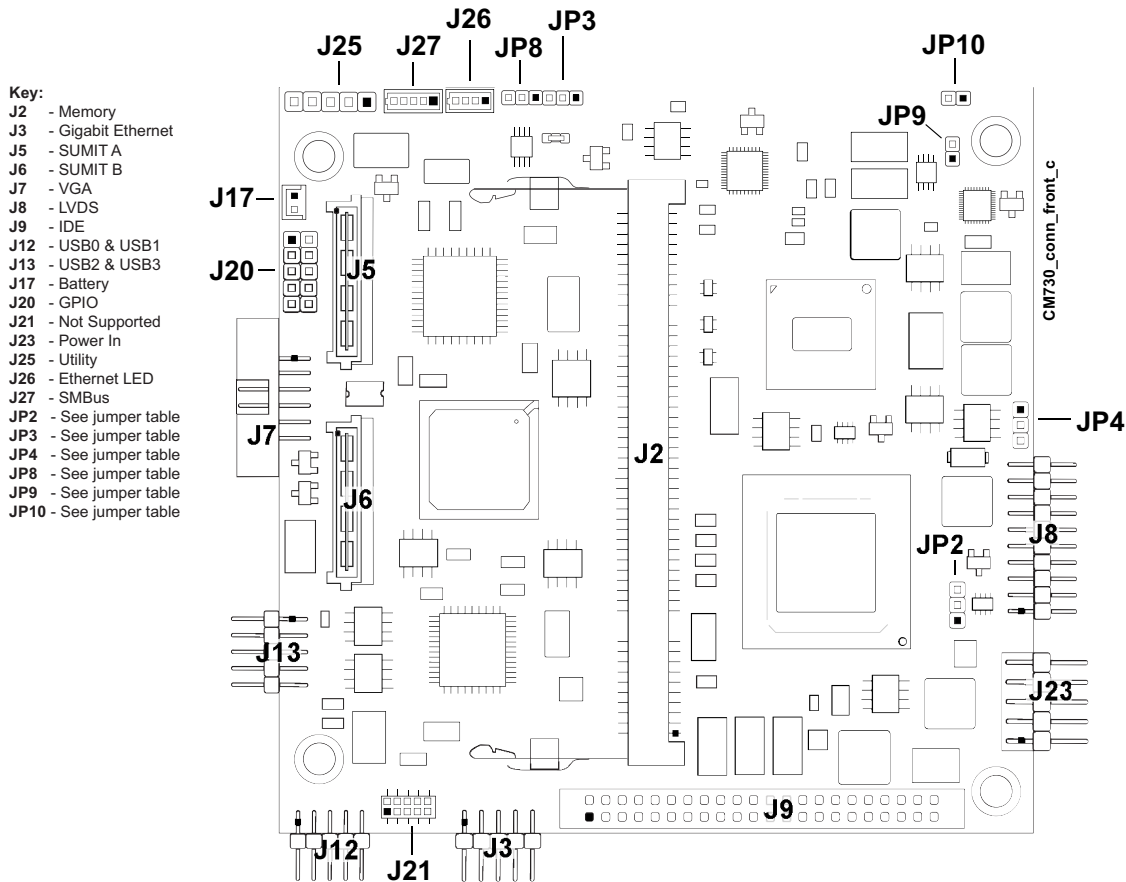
Header, Connector, Socket Locations (Top Side)
